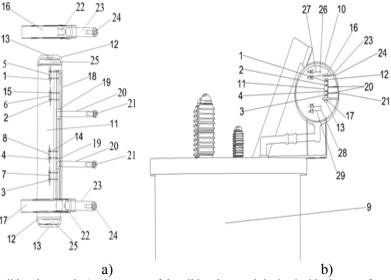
Transformer oil level control, a); placement of the oil level control device inside the transformer expansion tank, b)
